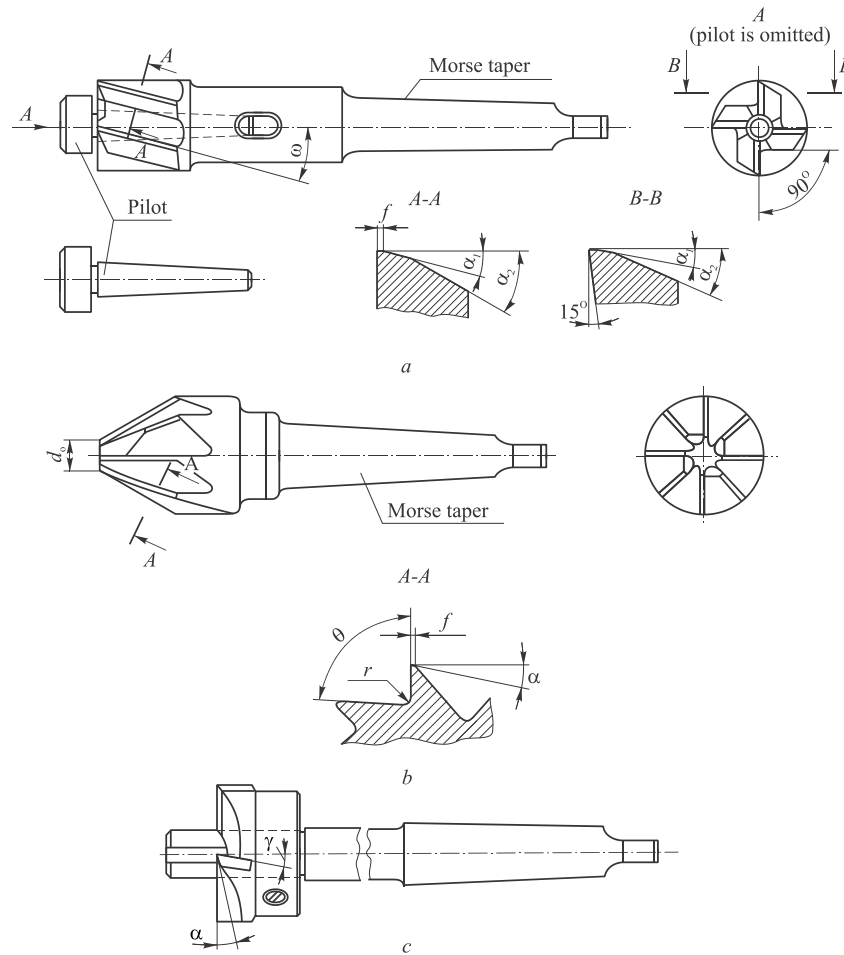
Core drills: (a) counter bore; (b) countersink; (c) spot facer
